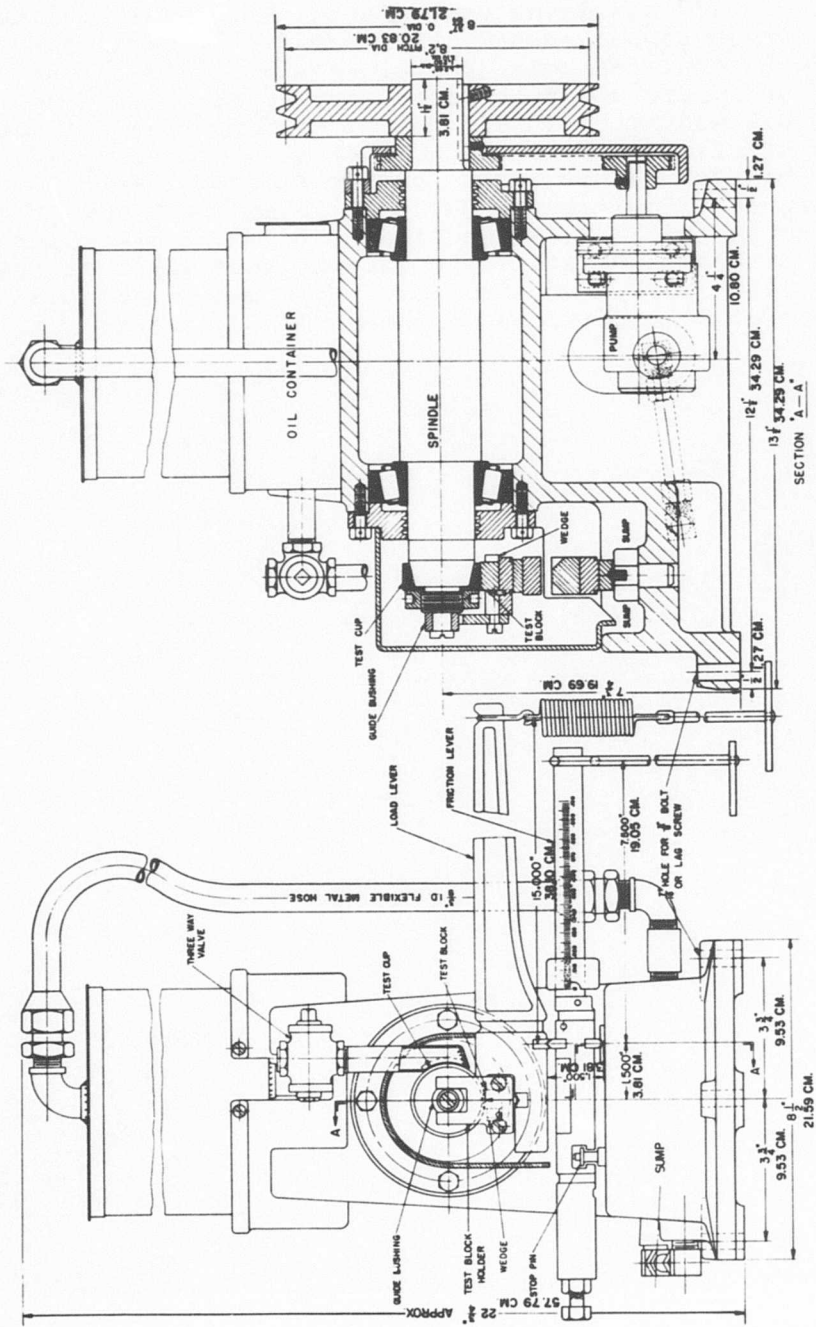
Section Drawing of Timken Lubricant and Wear Test Machine.
